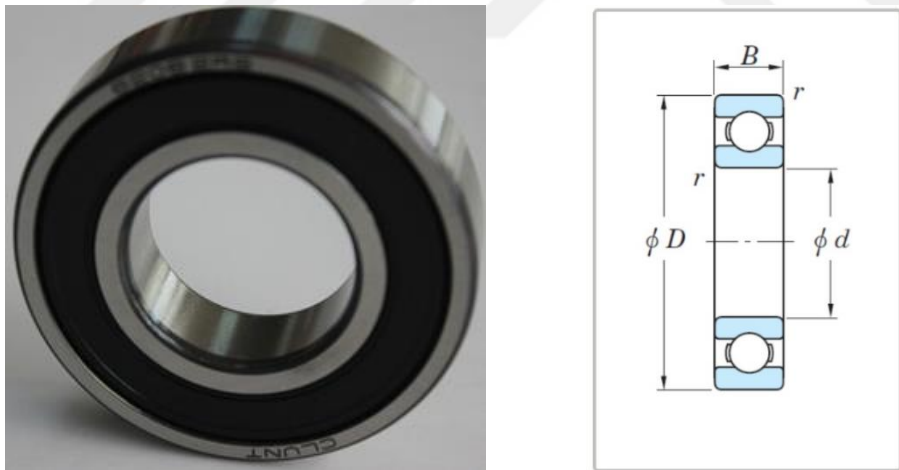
Bearings for inner and outer gear shafts housing (Makparsan, 2017 a)
